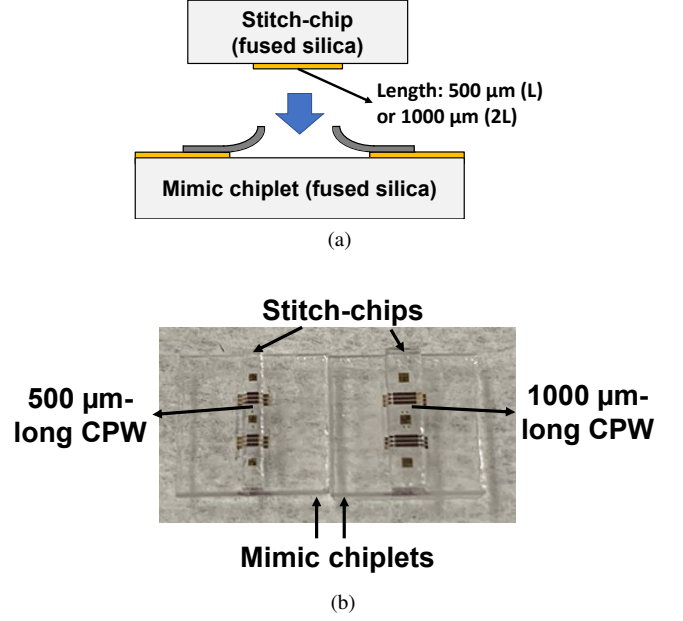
Assembly: (a) flip-chip bonding of the stitch-chip and the mimic chiplet and (b) samples after assembly
